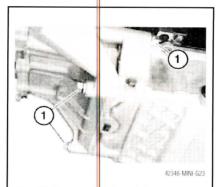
Showing location of the transaxle-to-oil pan bolts to remove
